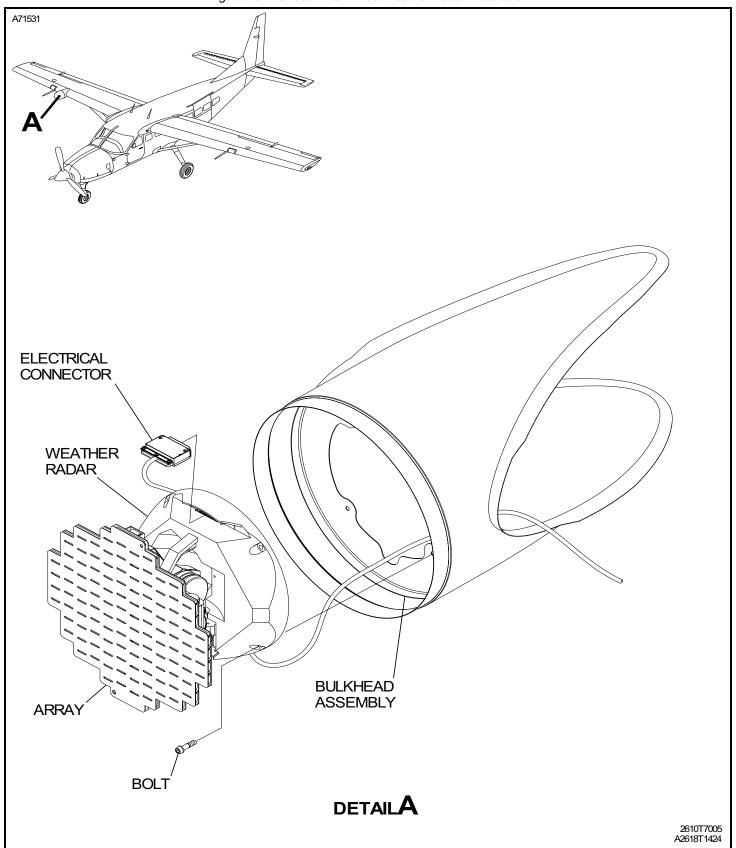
Sheet 1 : GWX-68 Weather Radar Installation
